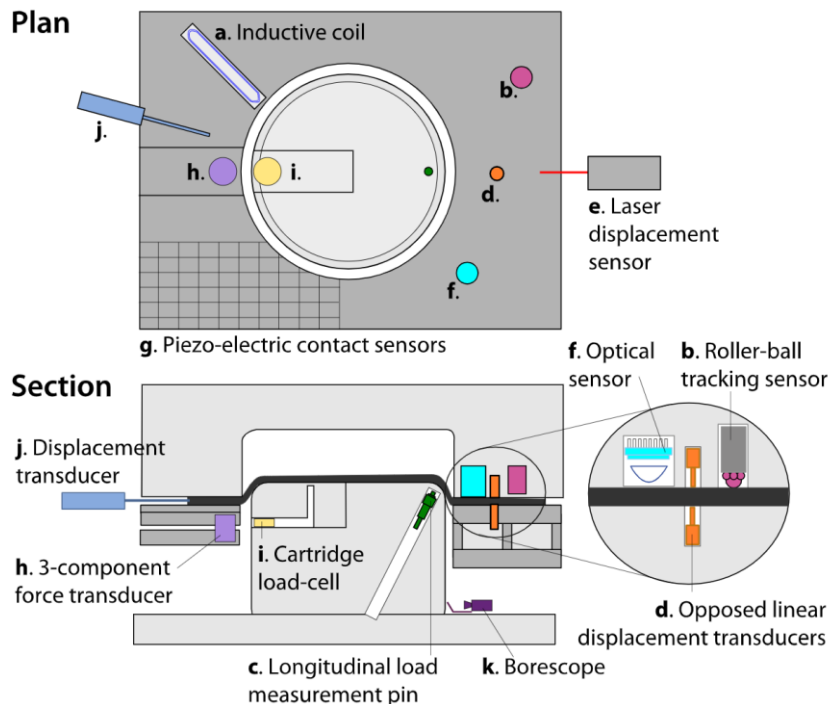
Example sensors and their placement for measuring material draw-in during a forming operation [58].
